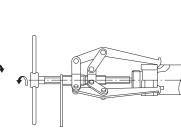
Removal of Inner Ring Using Withdrawal Tool (2)
